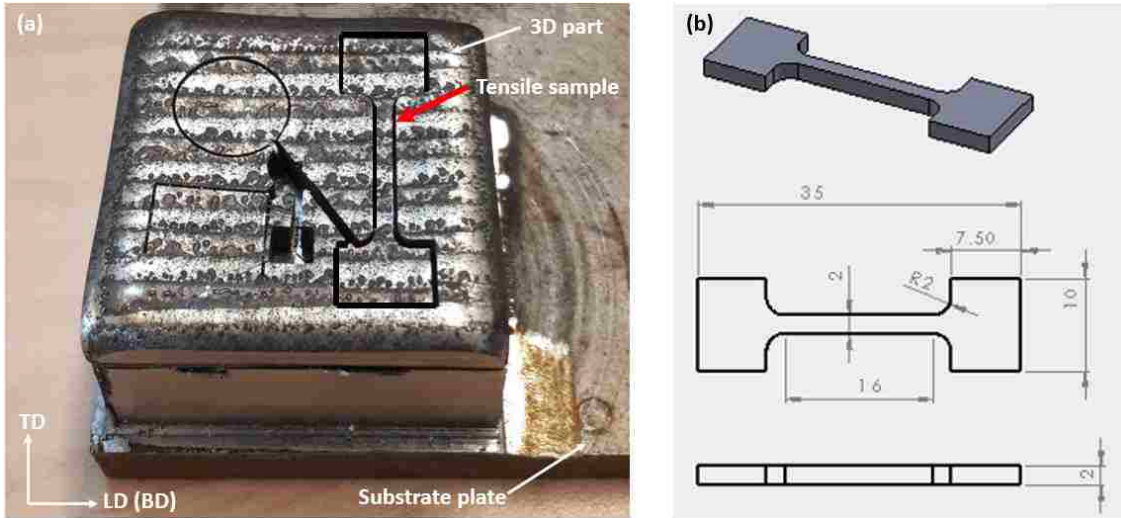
2 (a) Laser-cladded AM sample, (b) Schematic view of the micro-tensile test specimen with dimensional specifications in mm.
